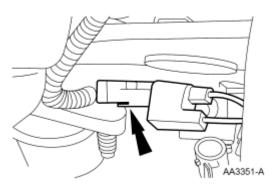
Camshaft Position (CMP) Sensor Electrical Connector Courtesy of FORD MOTOR CO.
